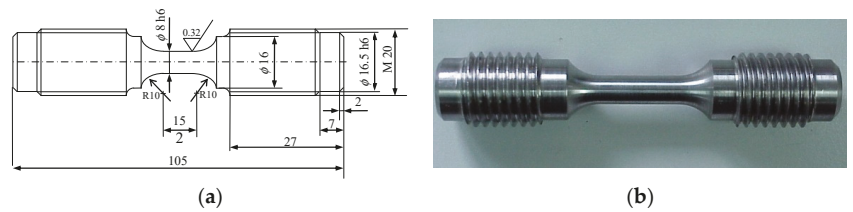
(a) Test sample dimensions (in [mm]); (b) test sample view.
